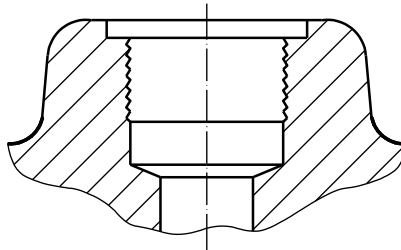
Machined Face Suitable for Gasket Containment if Using Cylindrical Threads
